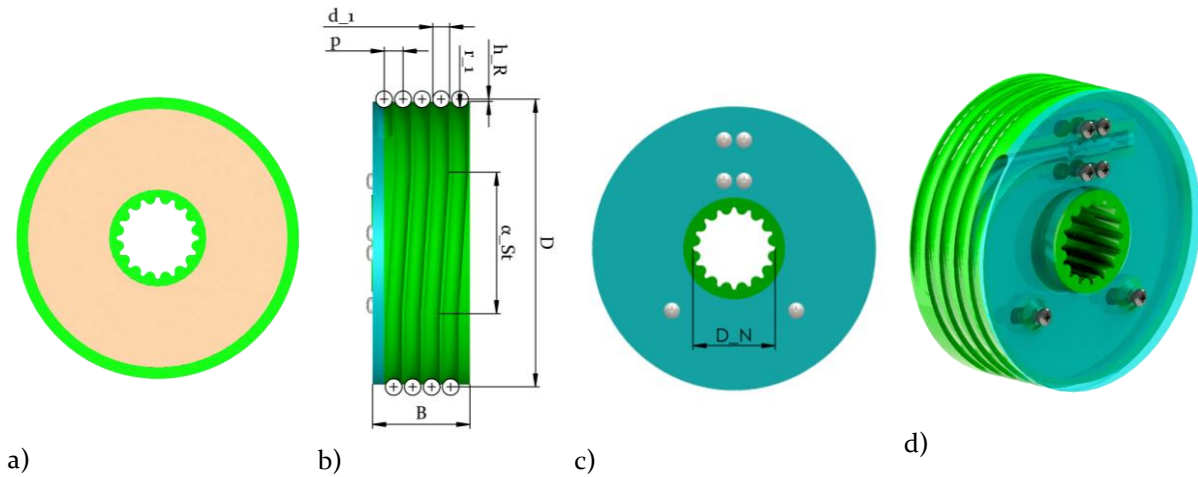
Illustration of test specimen; a) bottom view, b) side view, c) top view, d) isometric view with transparent clamp element
